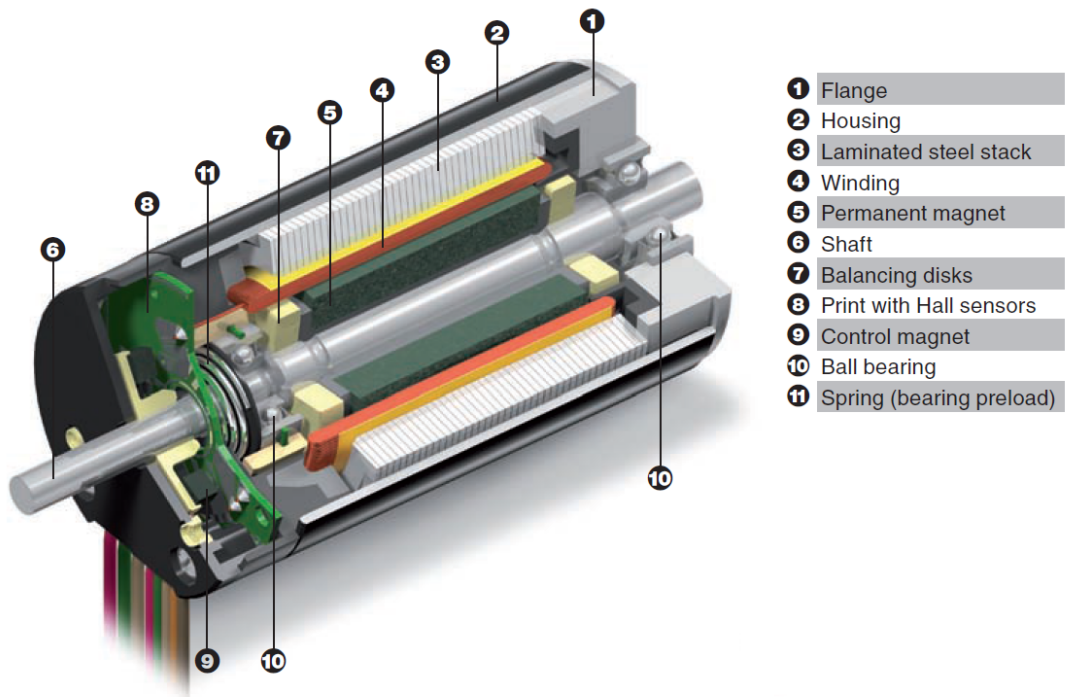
BLDC Motor - construction of a brushless DC motor [13, p. 26-27]
